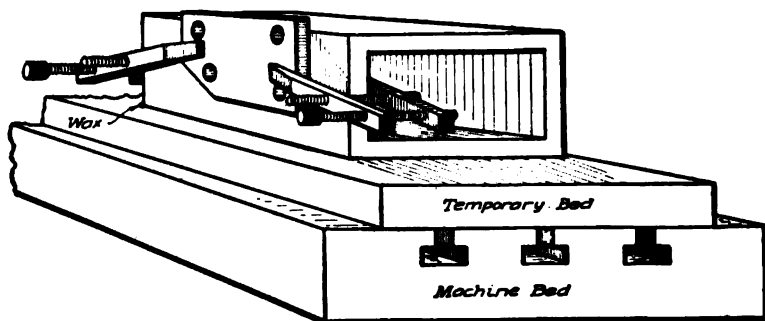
Piece Clamped to Hollow Square on Machine Bed
